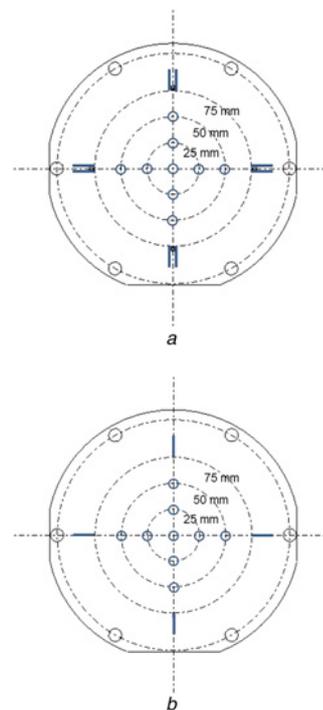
Layout of top mould insert having cylindrical posts and double rectangular steps (Fig. 3a), and of complementary mould insert containing cylindrical posts and rectangular steps (Fig. 3b)
